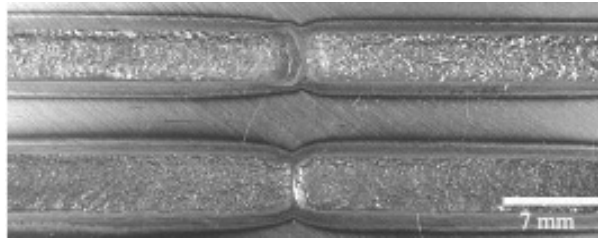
Face view after laser alloying with vanadium carbide, 32CrMoV12-28 steel, laser power of 1.2-2.3 kW
